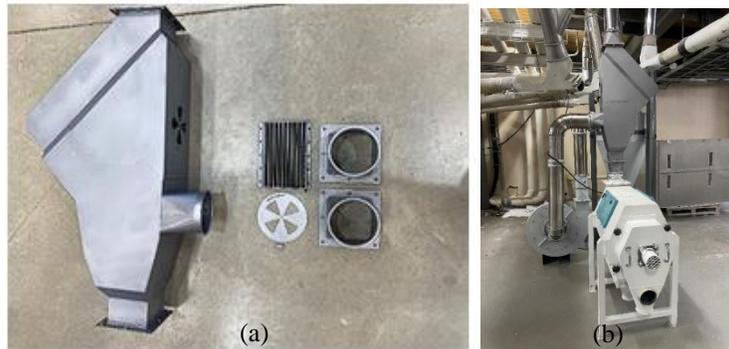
(a) Manufactured final design; (b) Final design experimental setup
